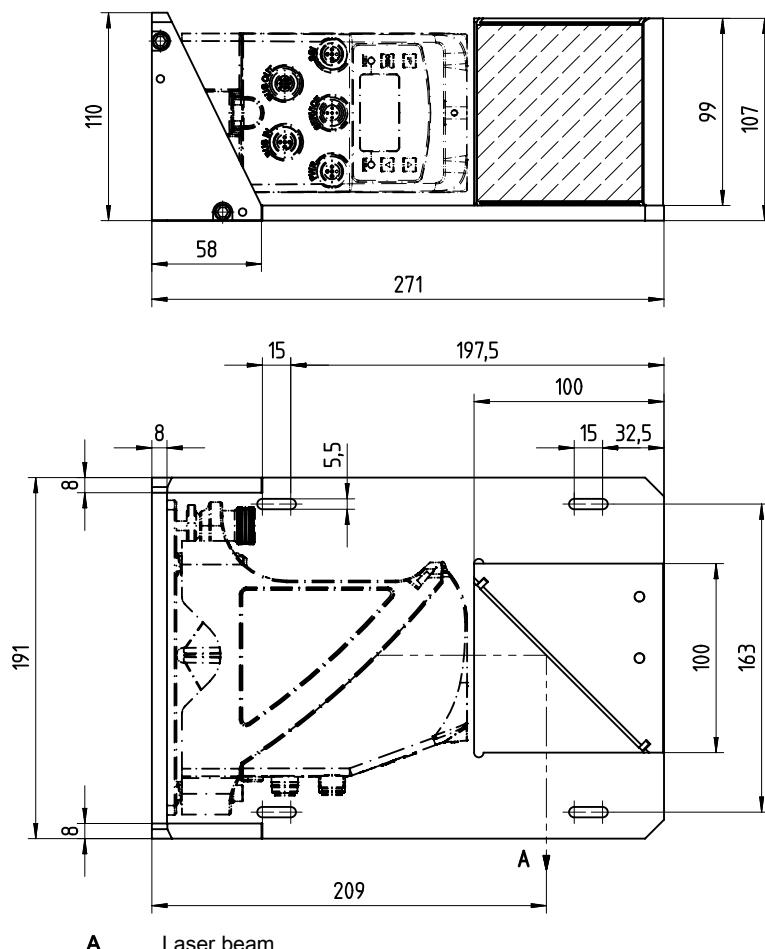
Dimensioned drawing of US AMS 01 deflector unit
